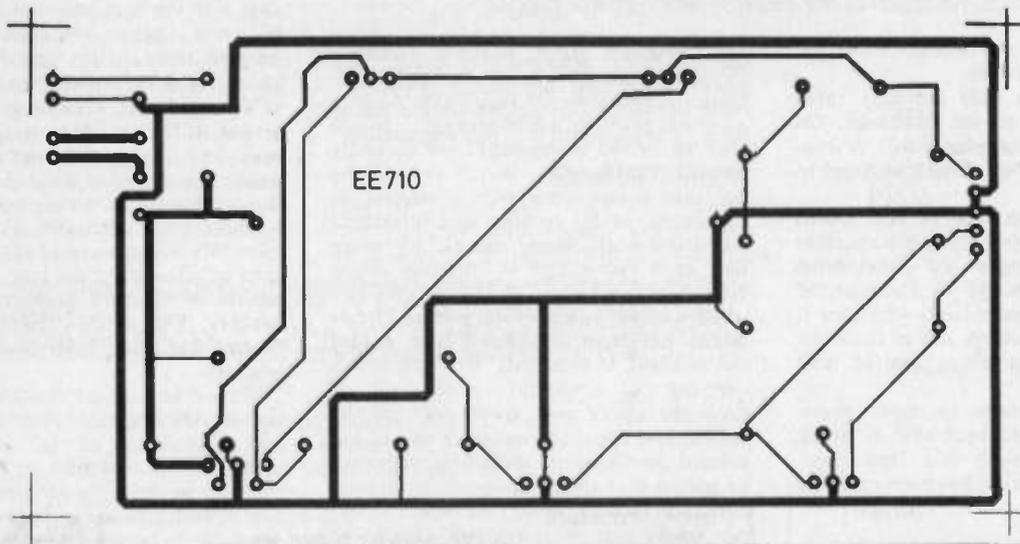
Copper foil and component layout for the power supply printed circuit board.
